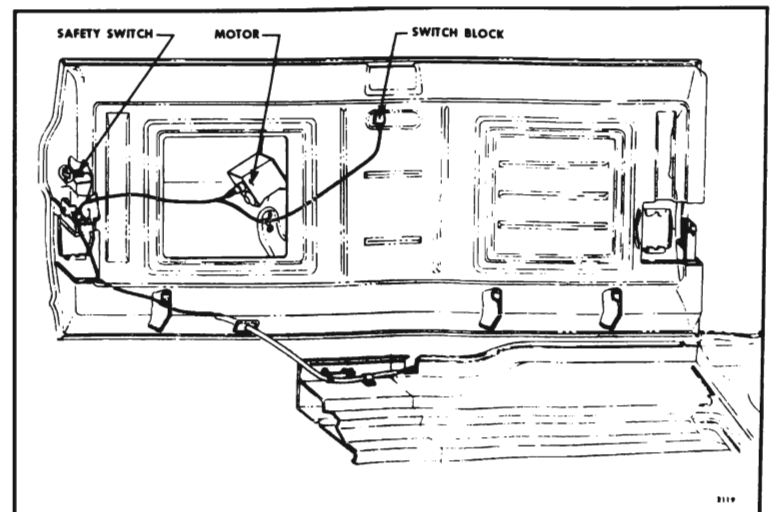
Tail Gate Wiring - Chevrolet "X" Bodies
